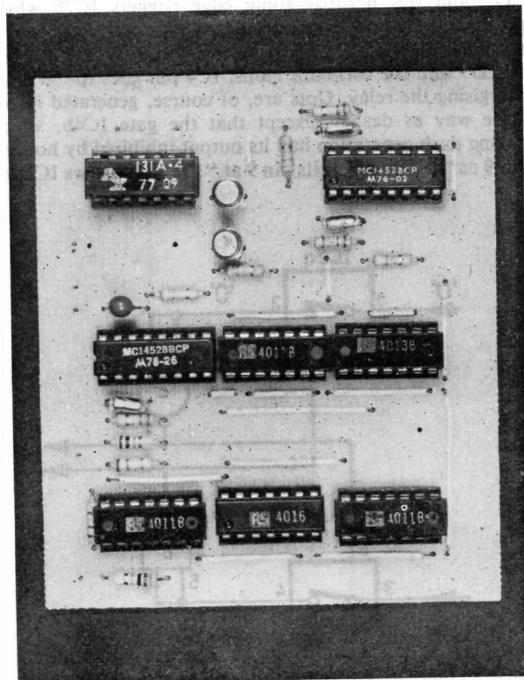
The C-MOS Keyer; actual board size is 3-in. by 3.6-in.
